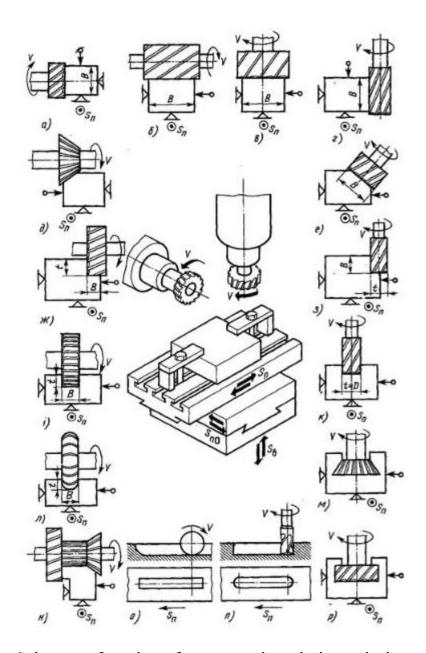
Schemes of motion of cutters and workpieces during milling; S π - longitudinal feed; Spo - crossed feed; SB - vertical feed.
